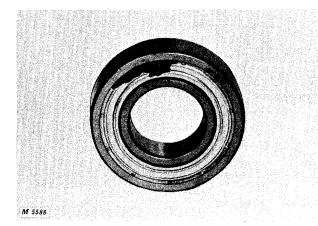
Oil Seal Damage Caused by Careless Installation with Sharp Tool
